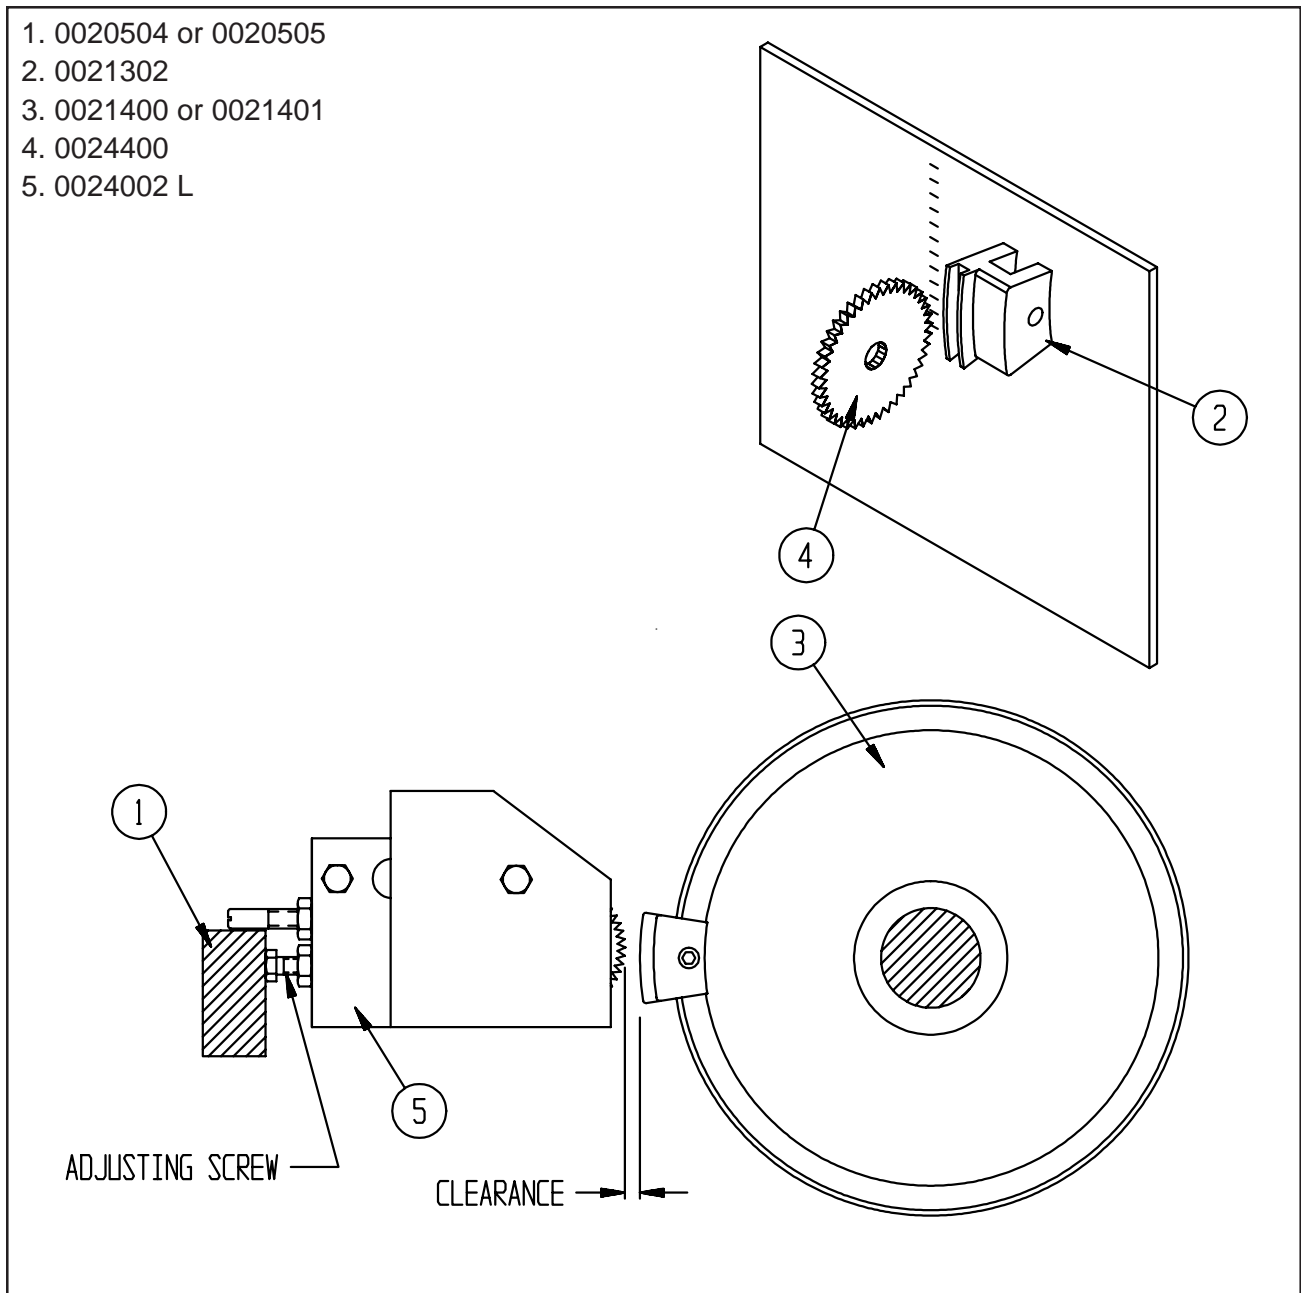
Adjust Clearance Between Program Segment and Application Wheel
